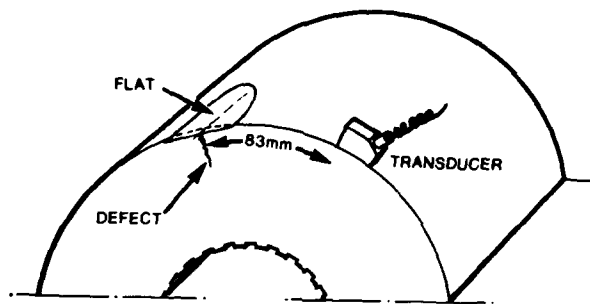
Geometrical arrangement of crack depth measurement system.
